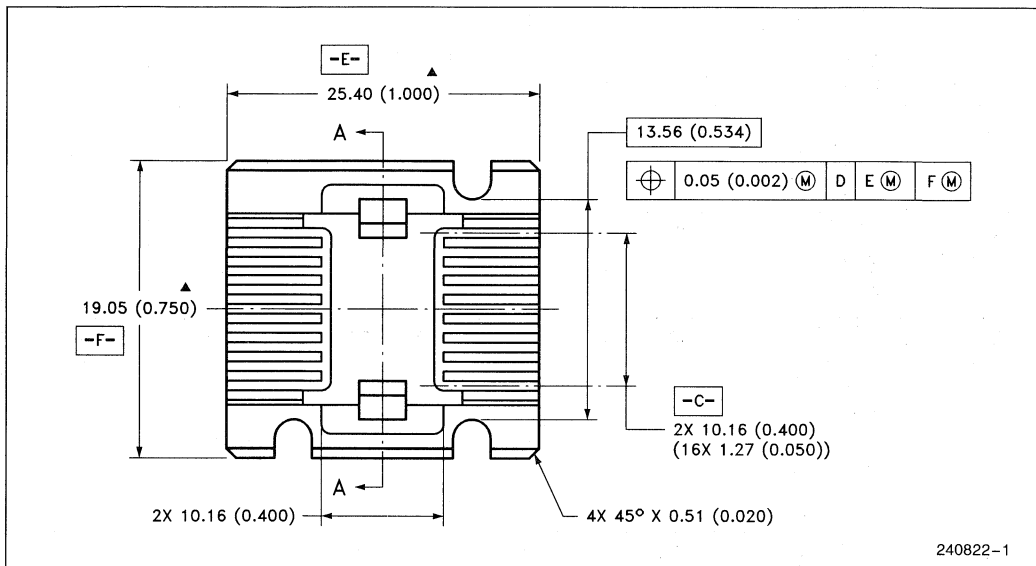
18-Lead Ceramic Flatpack Carrier
